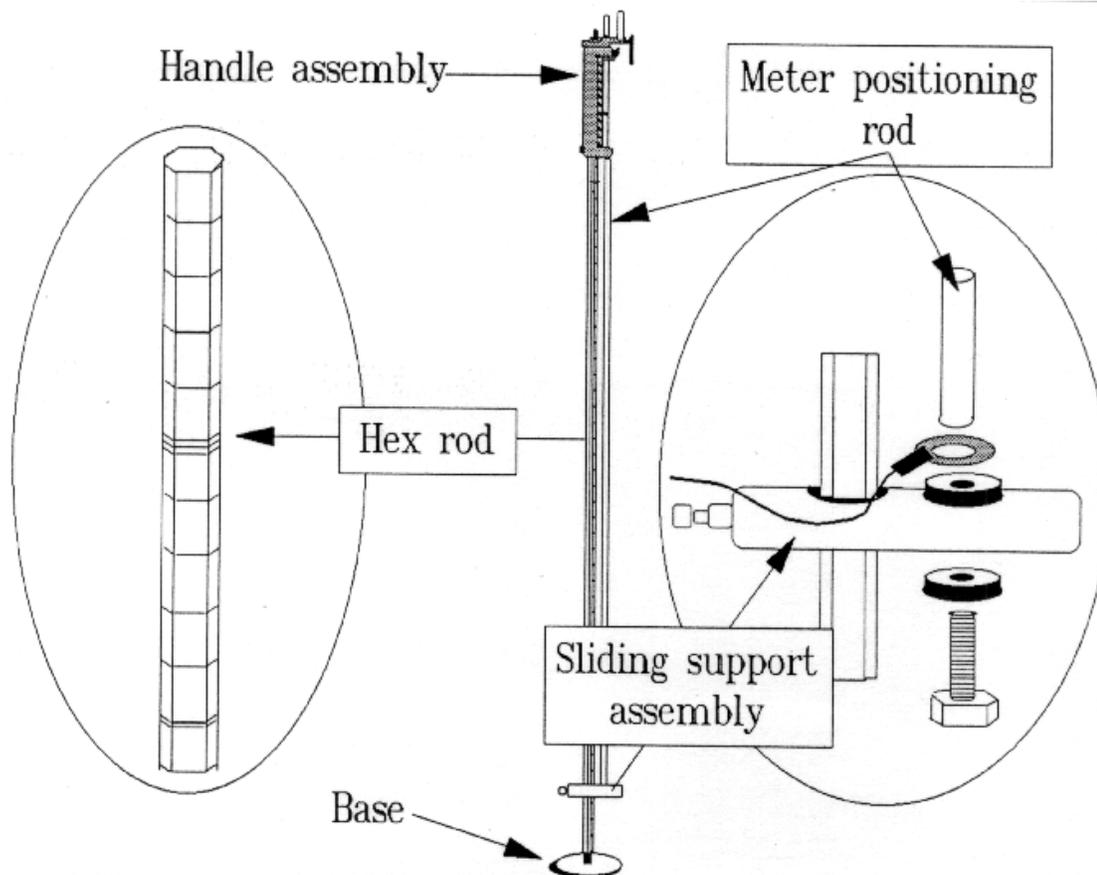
Parts of a top-setting wading rod. Exploded views show the markings for depth measurements on the hex rod and the insulated assembly of the sliding support.
